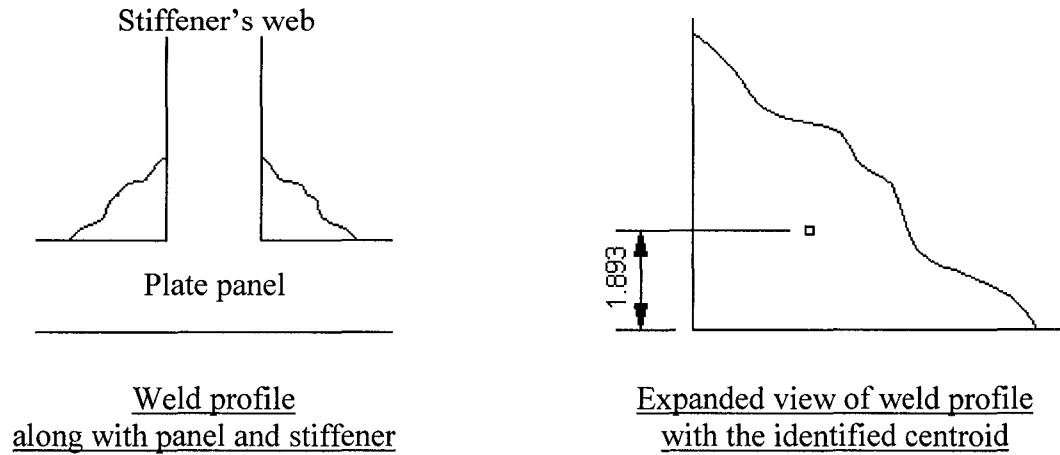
Cross section of weld profile with parts of panel and stiffener
